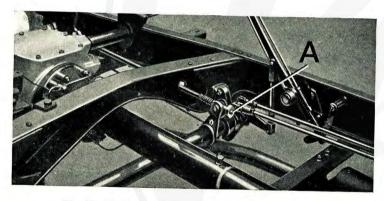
Showing Main Adjusting Nut for Four-wheel Brakes.
